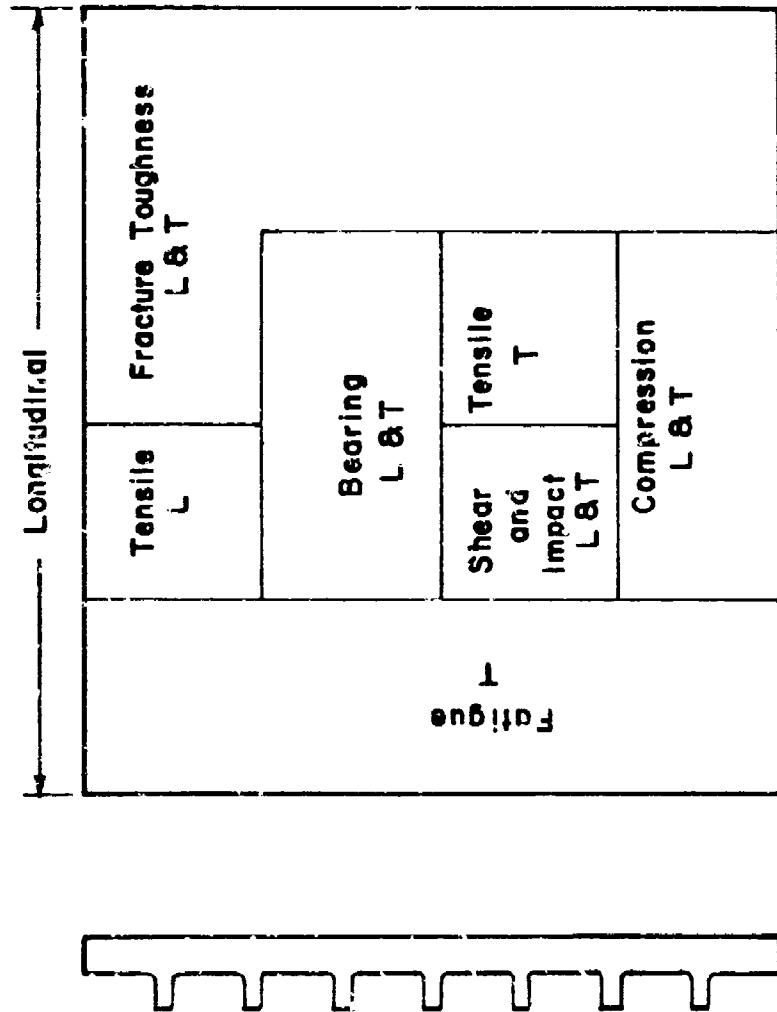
SPLCIMEN AREA LAYOUT FOR 7070-T73 ALUMINUM ALLOY EXTRUSIONS
